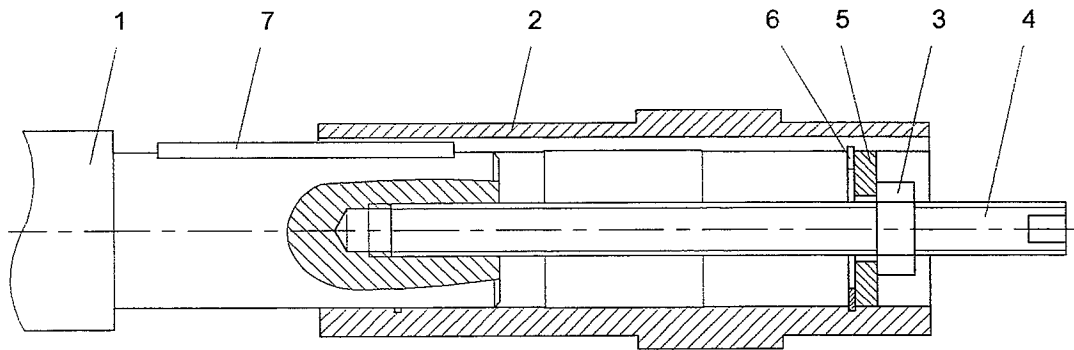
Mounting hollow shaft and parallel key
